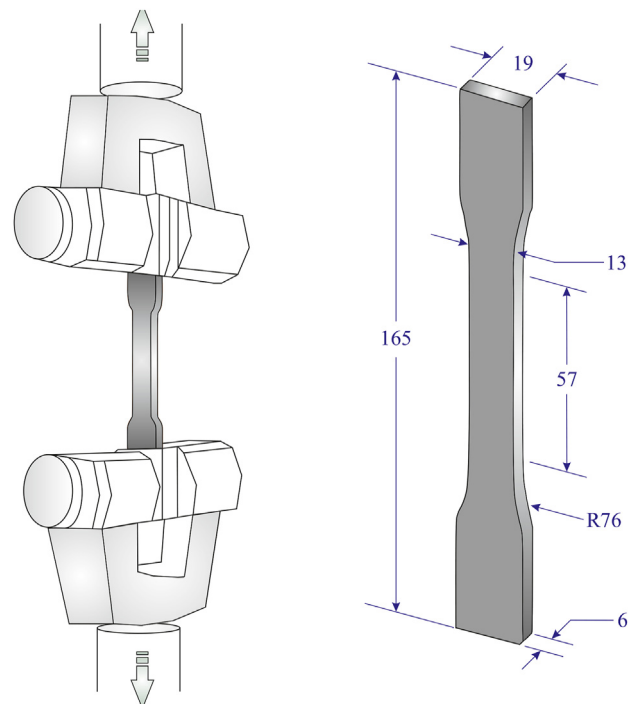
Geometries of a dumbbell-shaped specimen and schematic of tensile test conditions (dimensions in mm).
